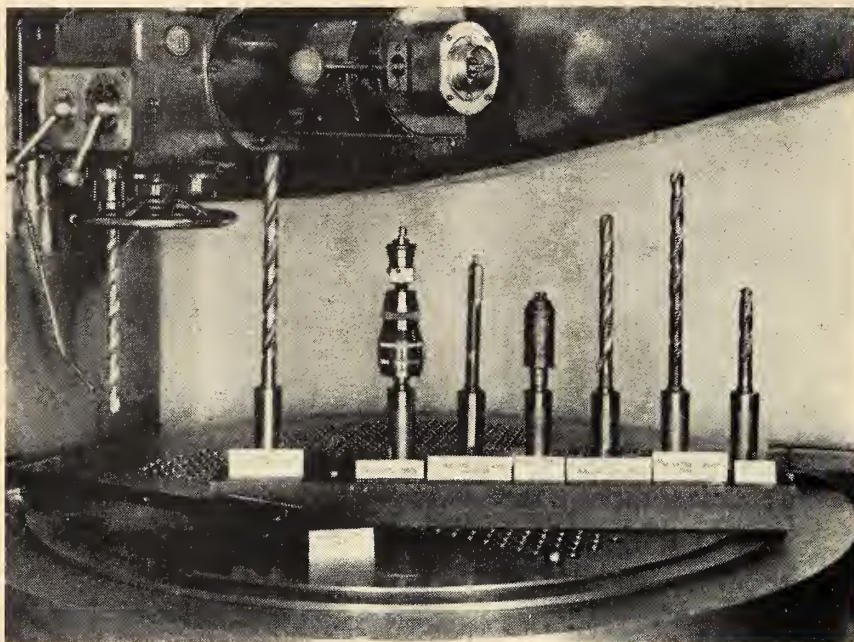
Sequence of tools required for production of mirror-finish holes in high-pressure feed heater tube plates.
